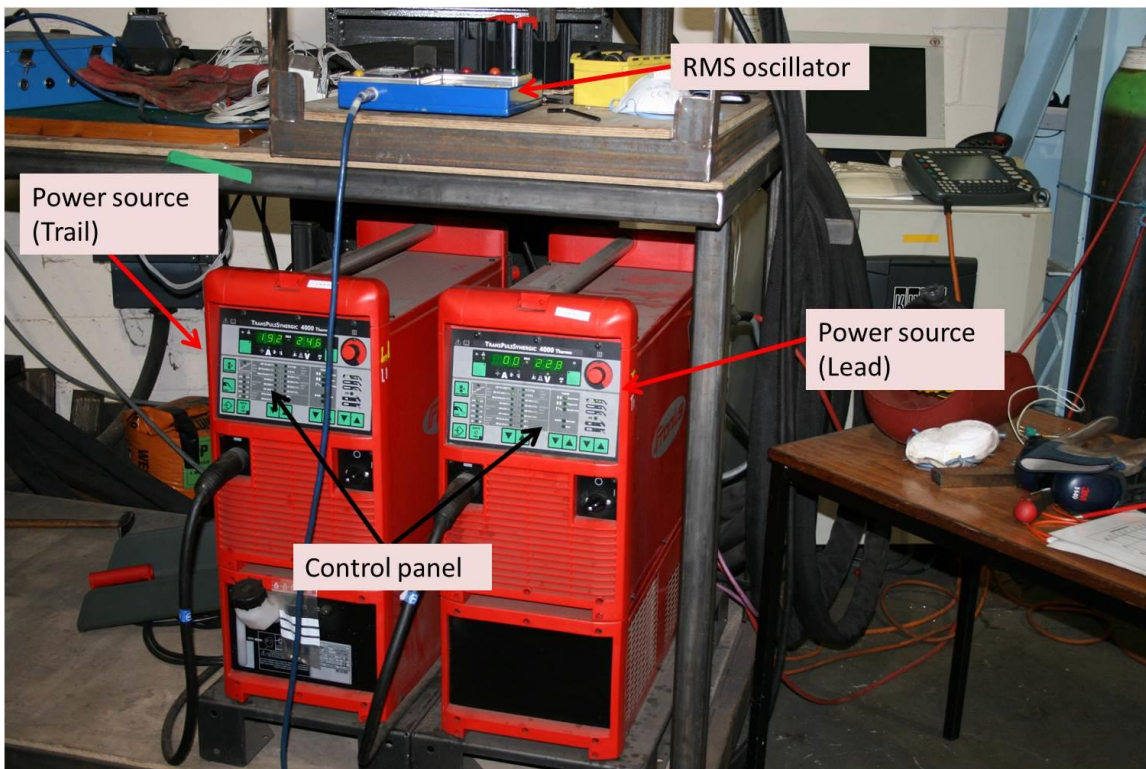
Fronius TPS 4000 thermo power welding machines
